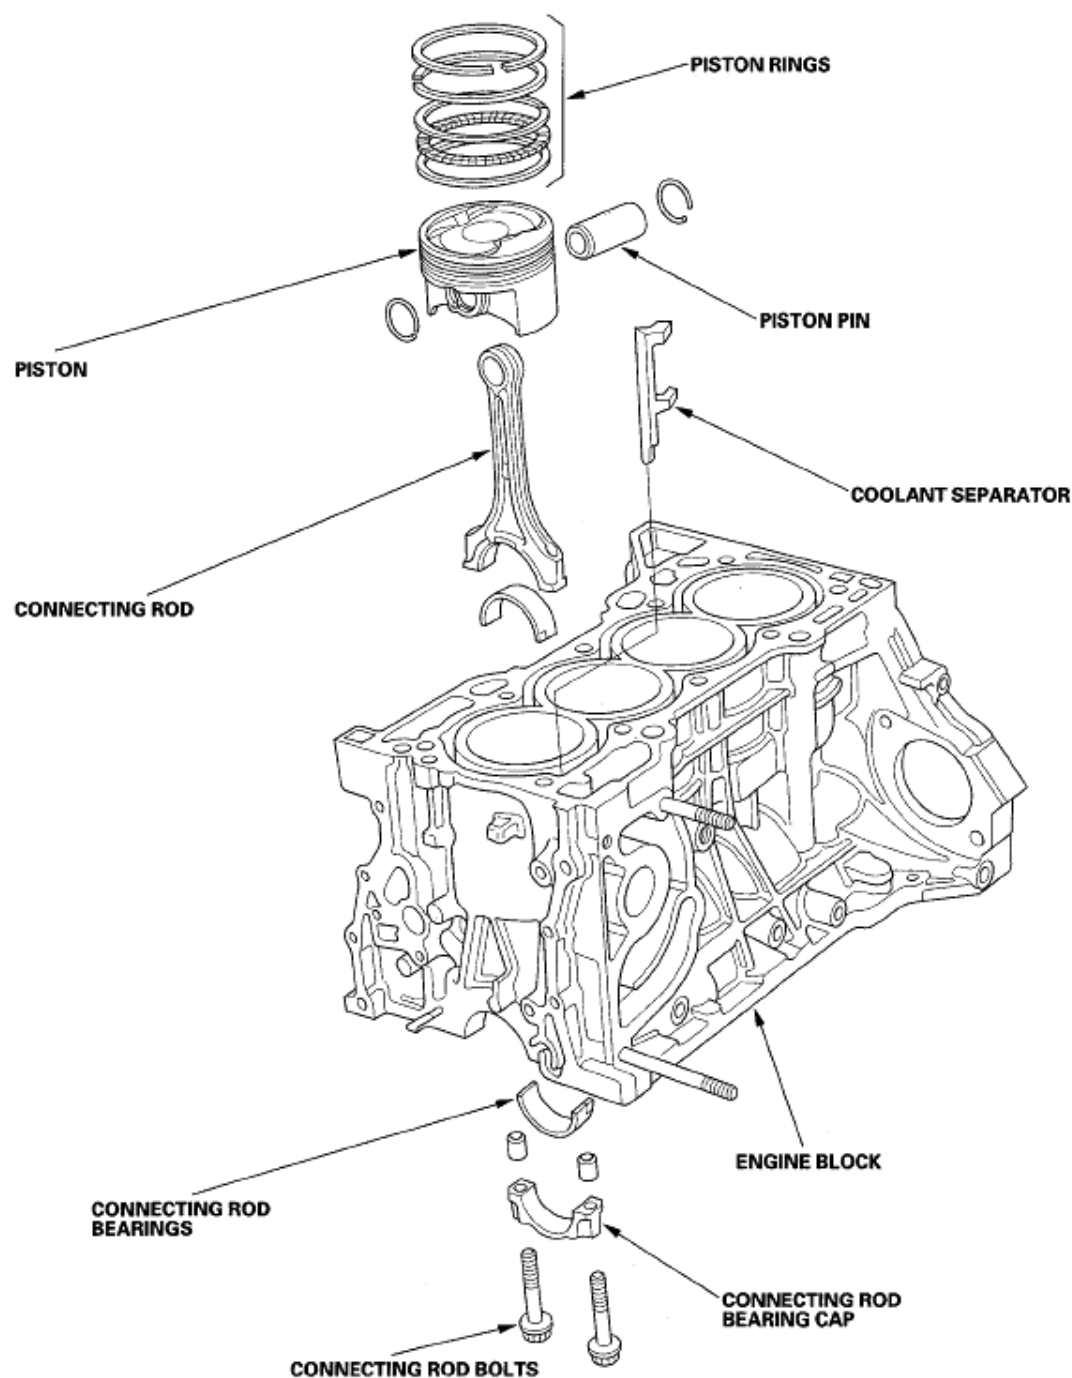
Identifying Engine Block Replacement Components (2 Of 2)
